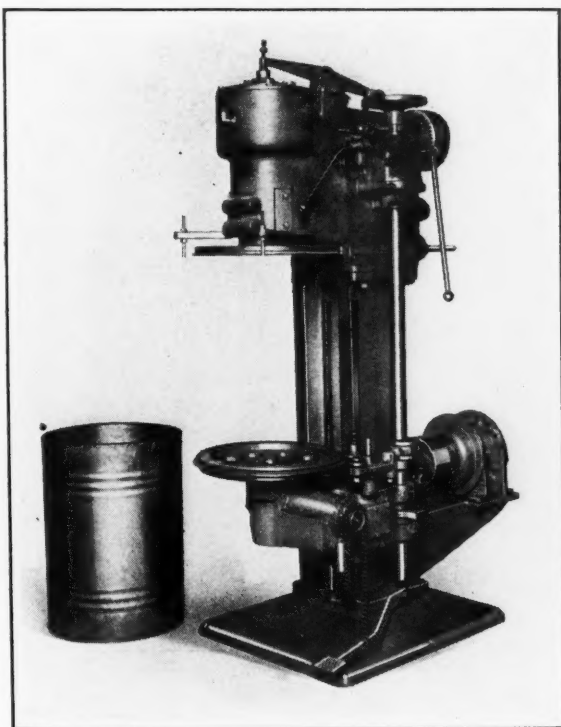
Bliss Double Seamer with Single-spindle Footstock
